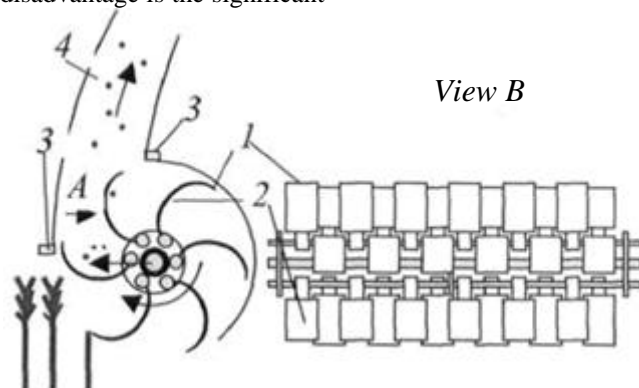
Rotary shredding machine with hinged knives: 1 - knife blade; 2 - throwing blade of the knife; 3 - anti-cutting plate; 4 - unloading branch pipe
